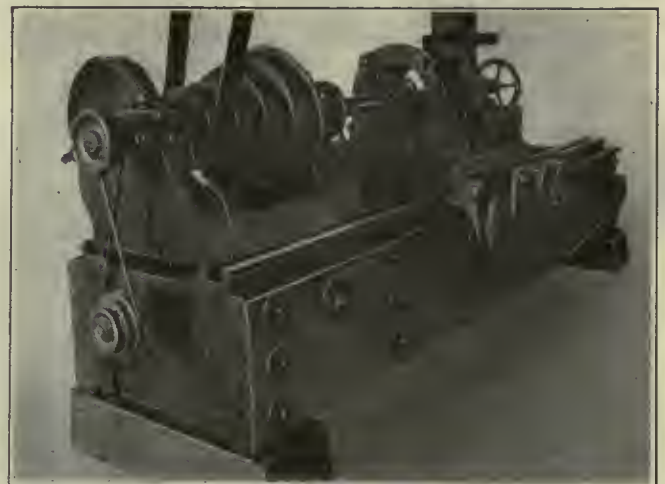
BELT-FEED ENGINE LATHE, BUILT BY ALVIN JENKS, PAWTUCKET, R. I., ABOUT 1833
